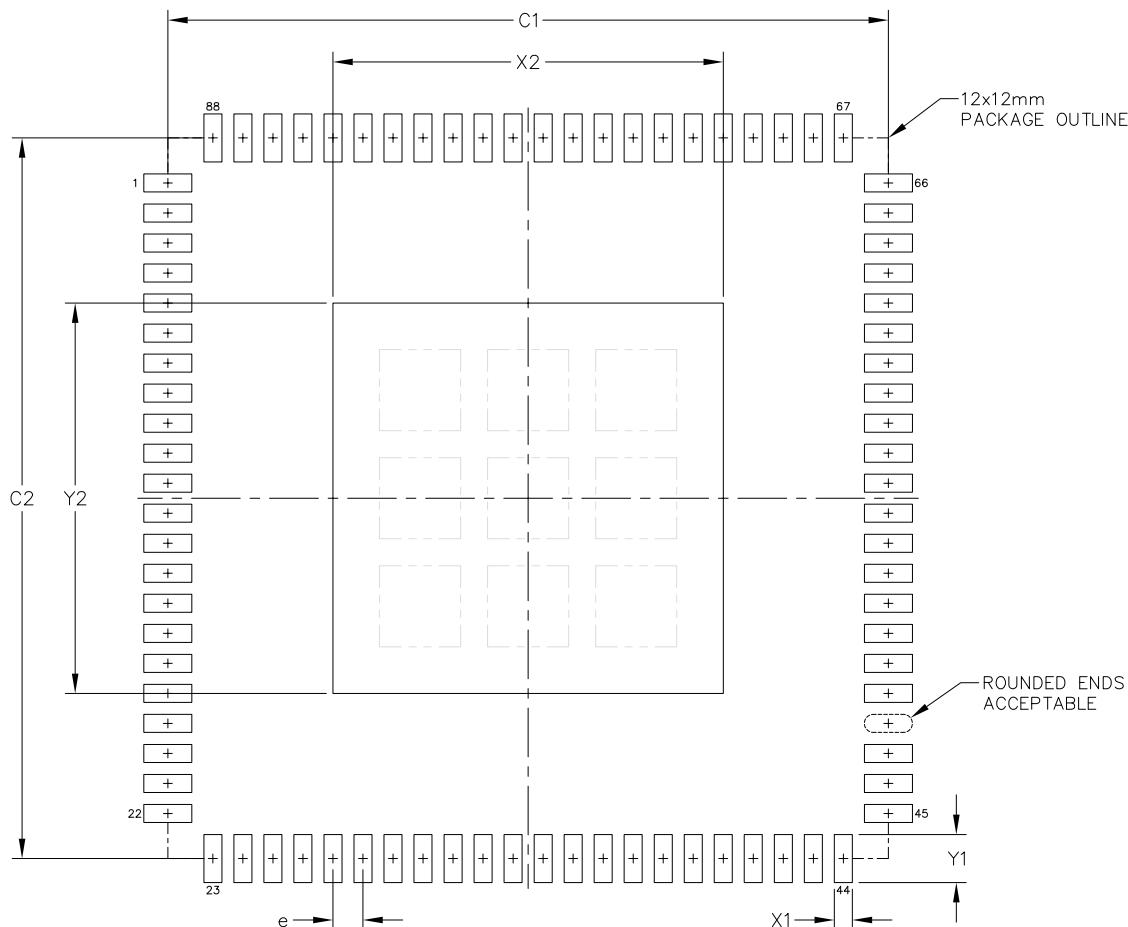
88-QFN 12x12 mm PCB Land Pattern
